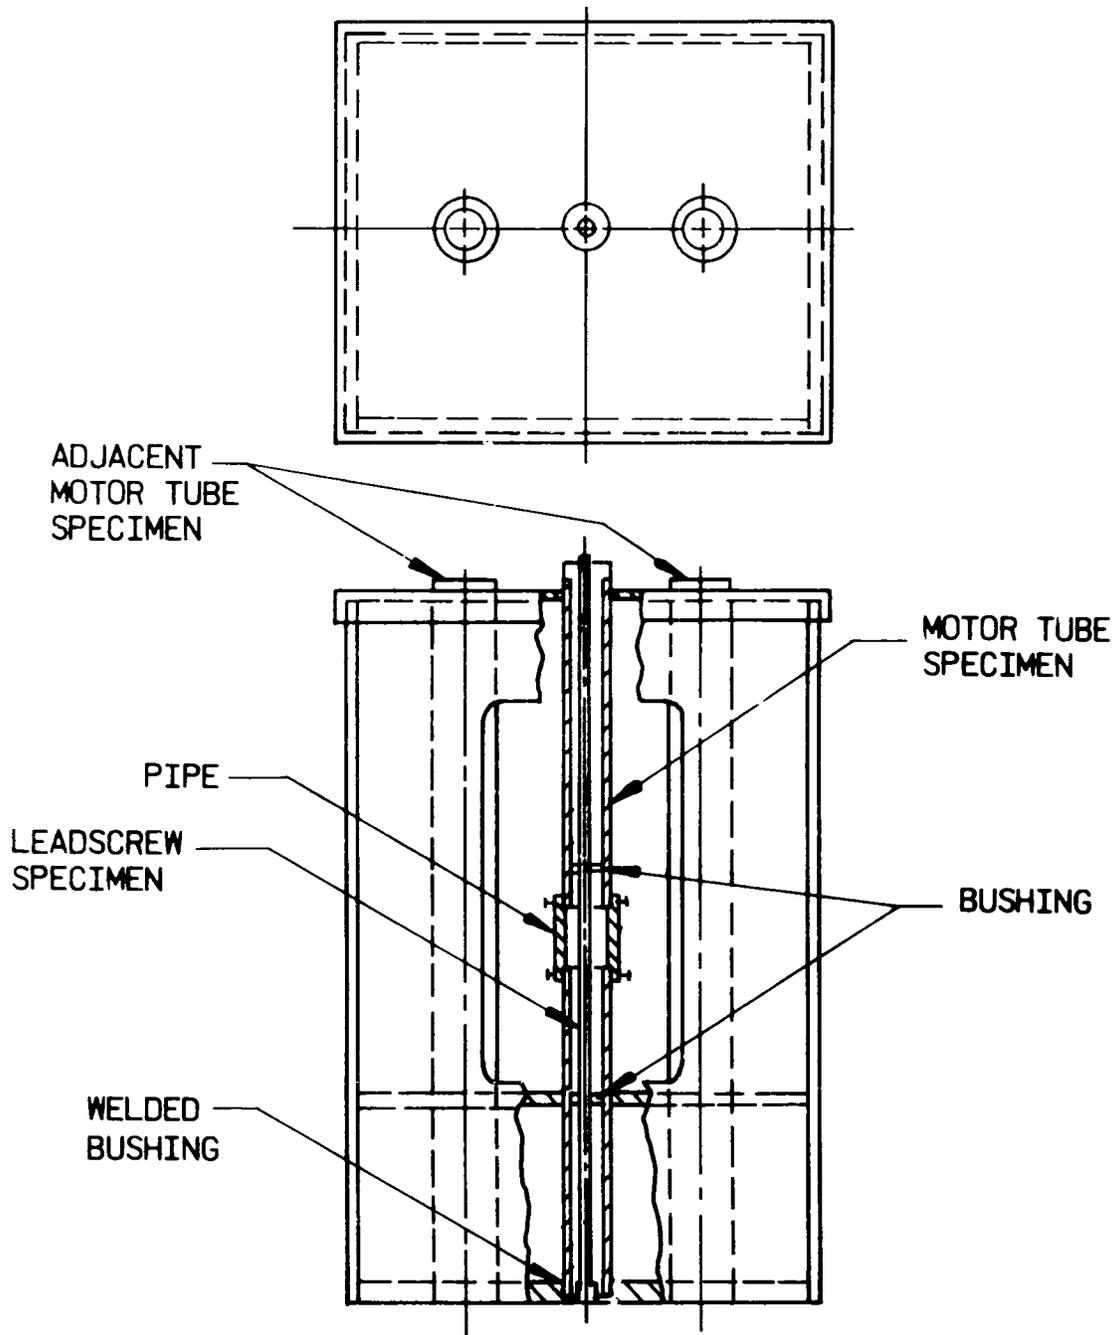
Motor Tube/Leadscrew Cutting Mockup
